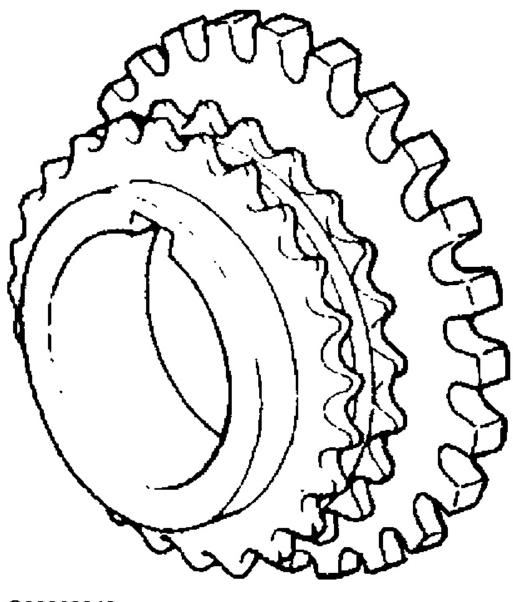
Checking 1st Timing Chain Crankshaft Sprocket Courtesy of SUZUKI OF AMERICA CORP.
